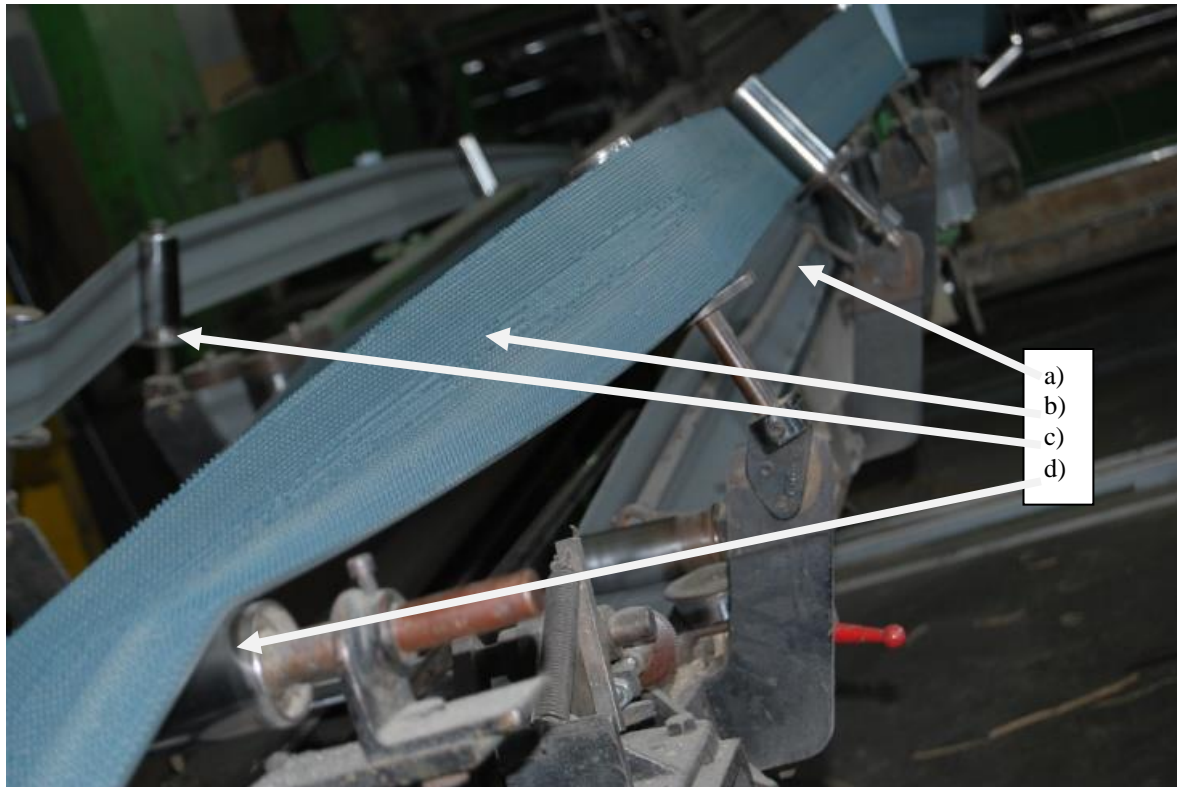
Belt system in paper packaging manufacturing plant: a) back side with v- guide, b) top side with special structure, c) guide roll for top side, d) guide roll for bottom side, with gap.
